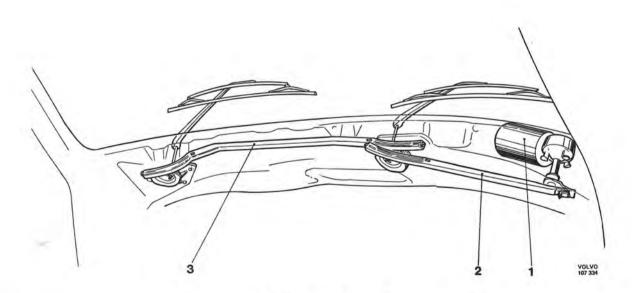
Windshield wiper unit 1. Wiper motor 2. Drive link 3. Parallel drive link
